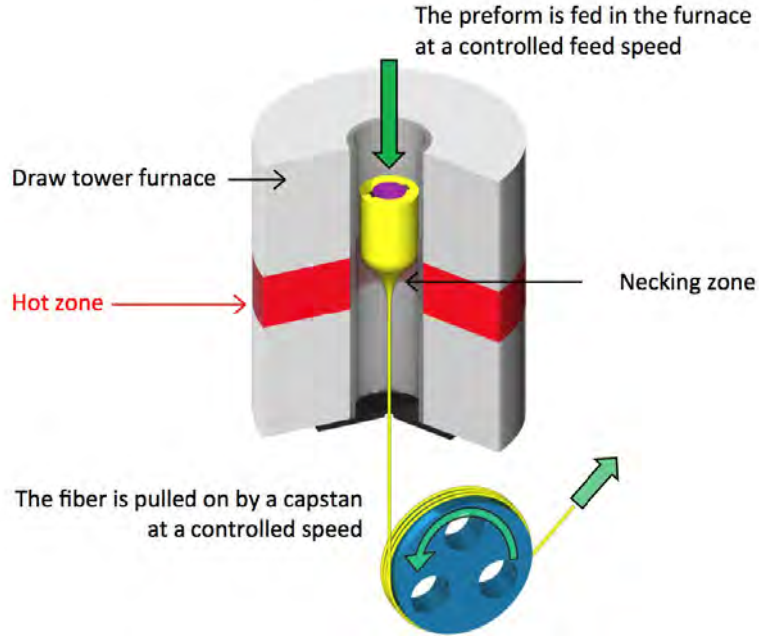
Schematic of the thermal drawing process. Figure courtesy of G. Lestouquoy.
